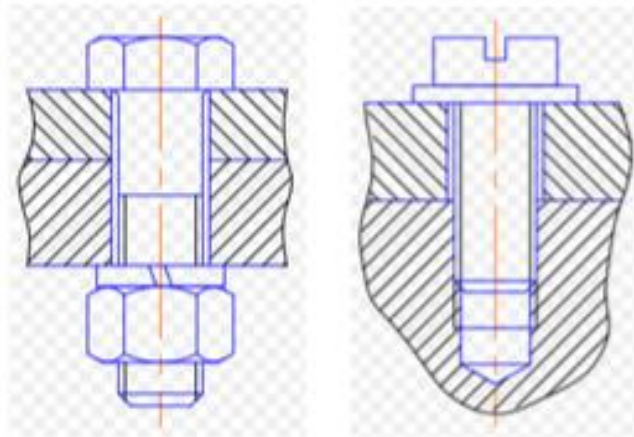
Bolted (left) and Screwed (right) joint [18]
